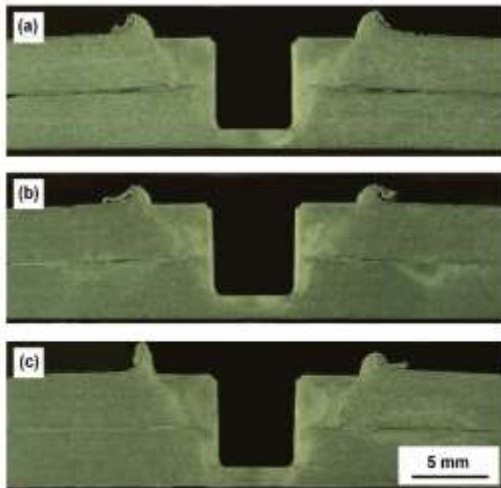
FSSW welded macrostructure by a cylindrical pin at RS: (a) 900 rpm, (b) 1400 rpm (c) 1800 rpm
